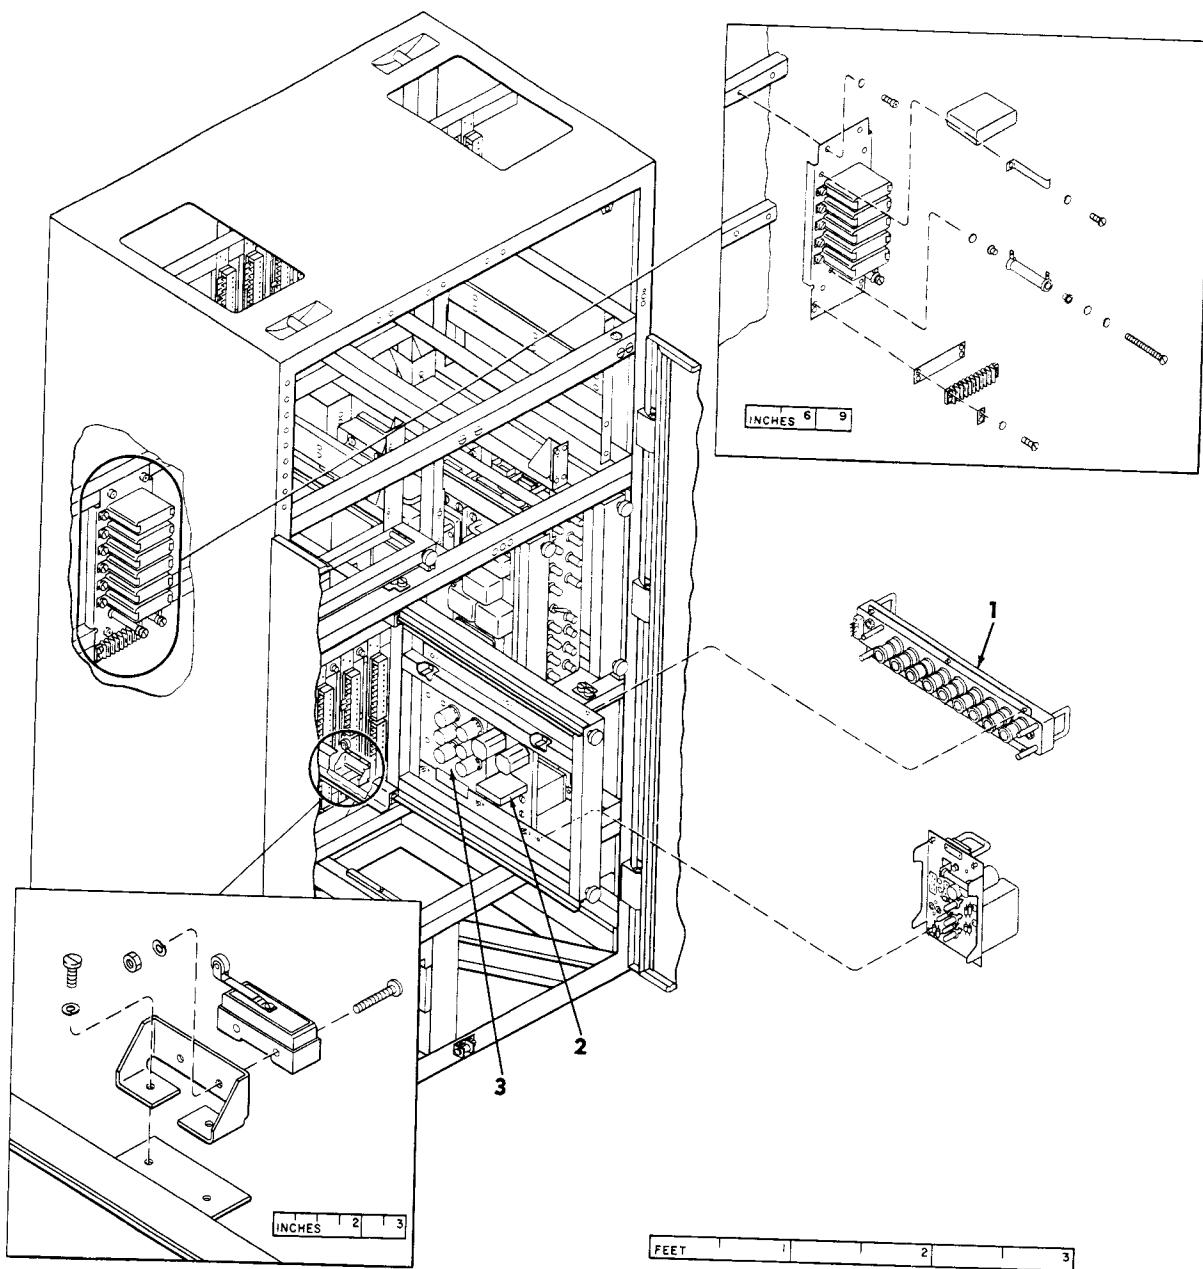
Control, receiver-transmitter (9141310) - partial exploded view
